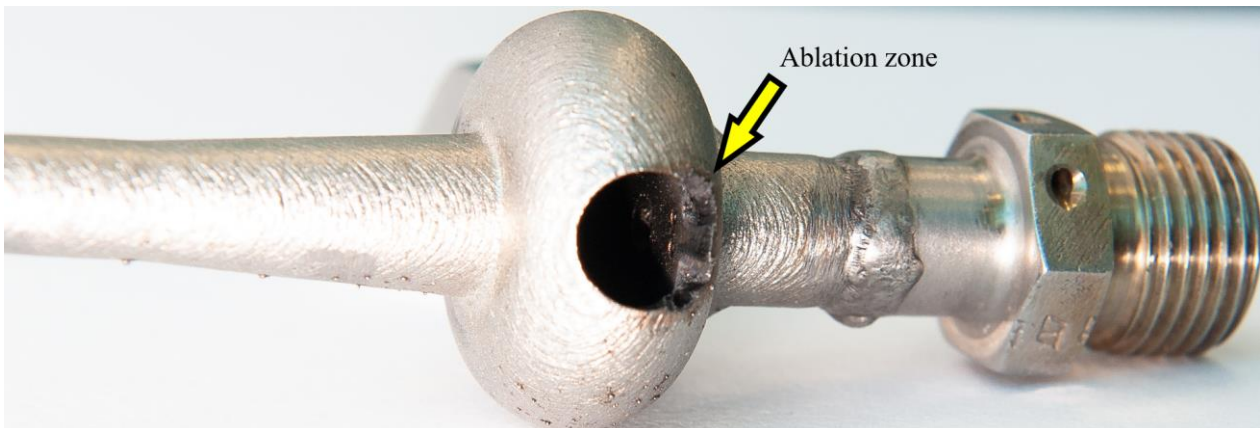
Material ablation at the outlet nozzle of igniter  $d=3.8$ mm after firing test
